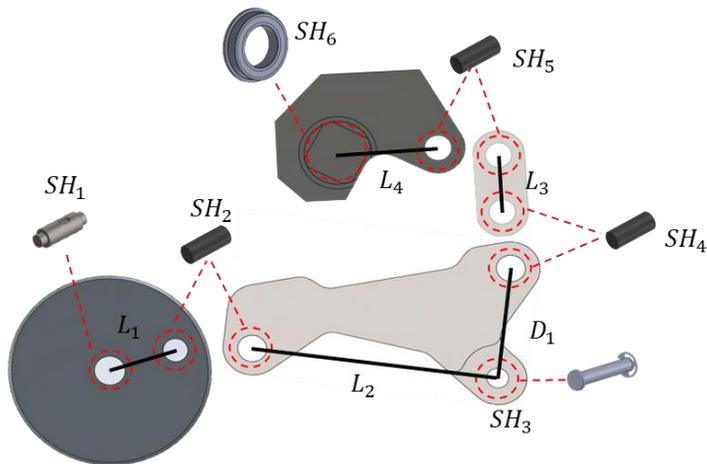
Mechanical design of the six bar toggle linkage mechanism
